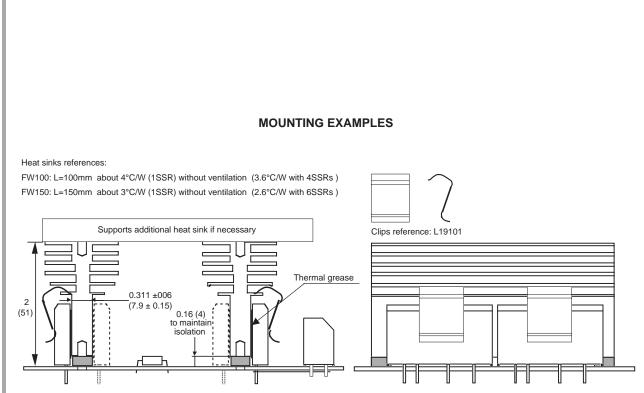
Thermal heat sinks with mounting clips; dimensions in inches (mm)
